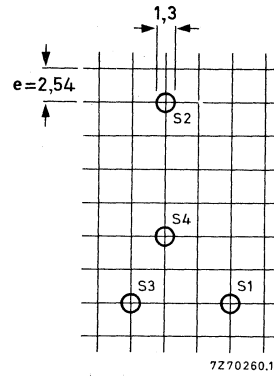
Hole pattern for mounting on a printed-wiring board (solder side)
